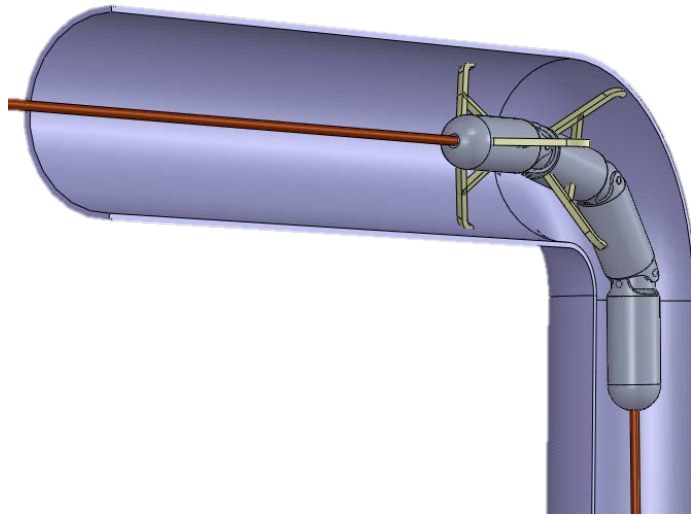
Chosen concept to elaborate further, focus will be on the clamping mechanism and cable-feeding mechanism.
